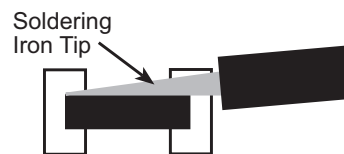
Laying Soldering Iron Tip Against Surface-Mounted Chip Component
